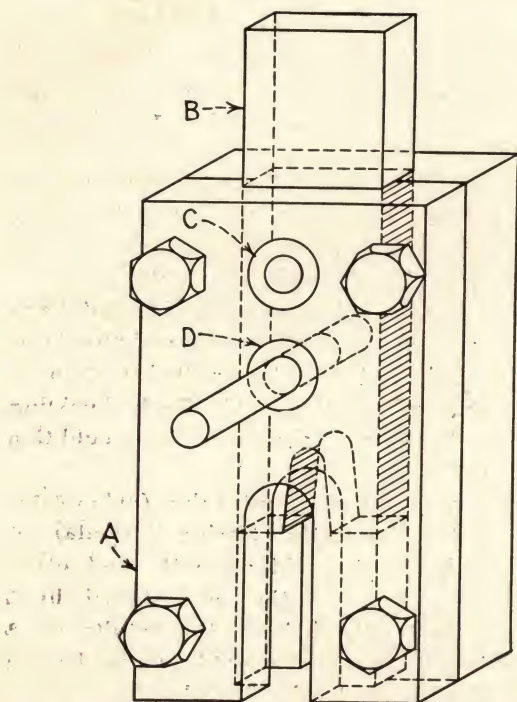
Diagram of a shear rig. Shows cutter in place for single-shear test on rod.
